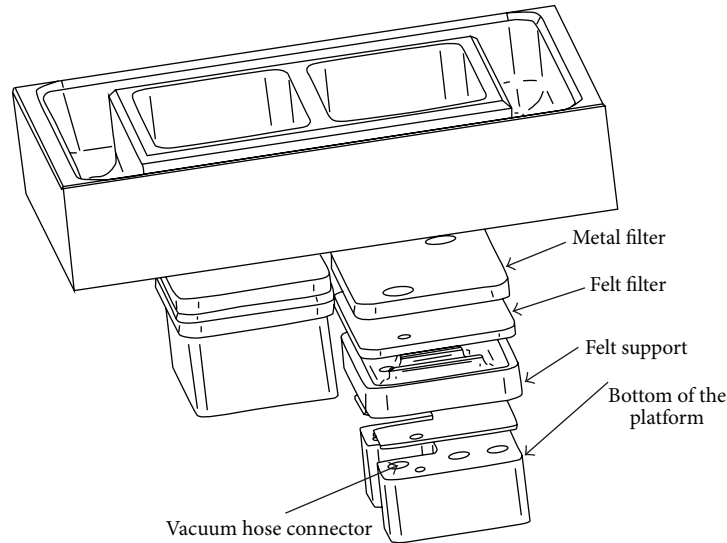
Exploded assembly drawing of the vacuum 3D print setup.
